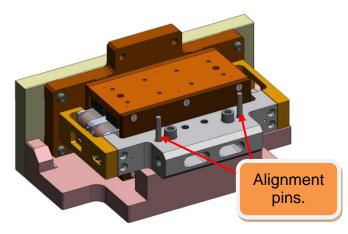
Install (2) alignment pins, then tighten Coil Support to Fixture. Now, location of Bobbin relative to Field Assembly is fully defined.
